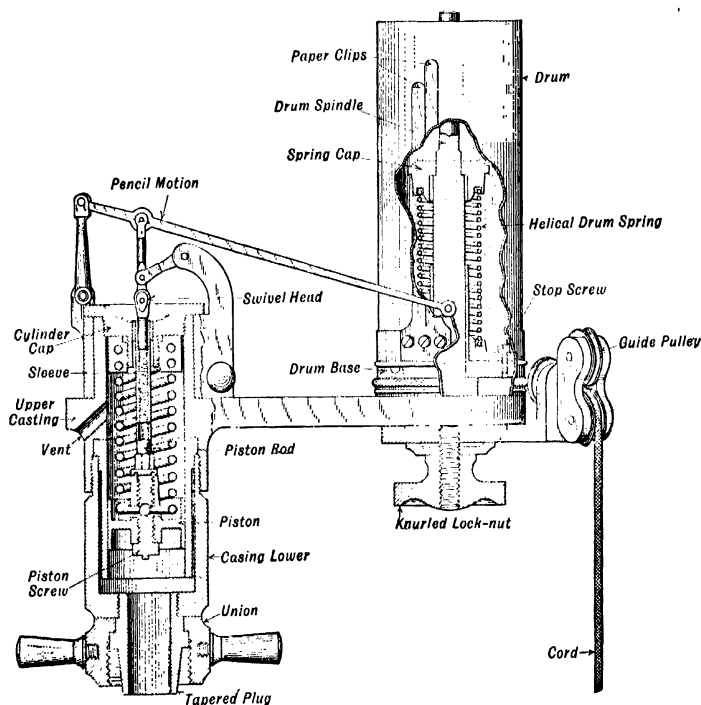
Sectional View of Crosby Inside Spring Steam Indicator.
